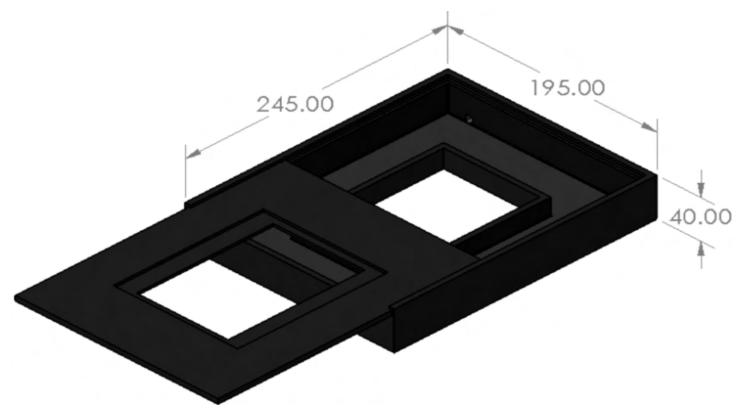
Hinge Top Acrylic Incubator drawing with dimensions in millimeters.
